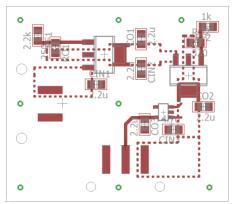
Exoskeleton Power PCB Layout
